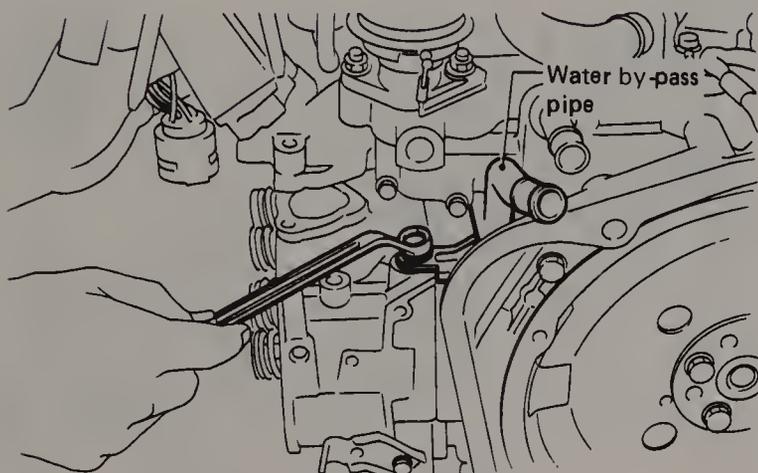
Remove the water bypass hose pipe (Sec 5)
